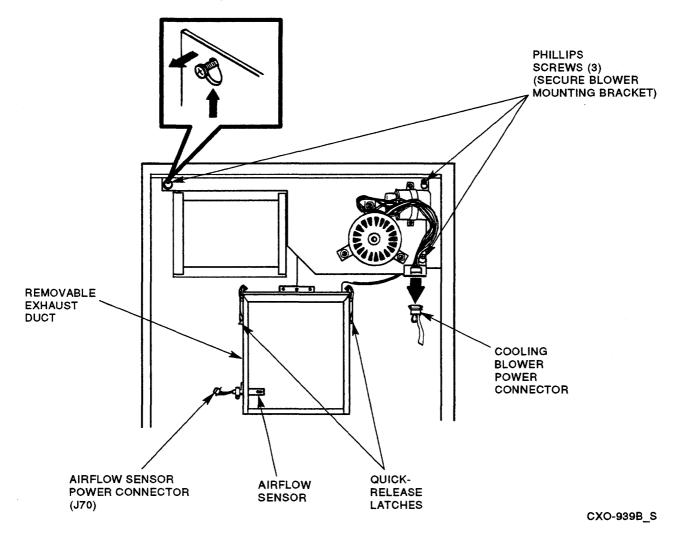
Removing and Replacing the HSC Main Cooling Blower
